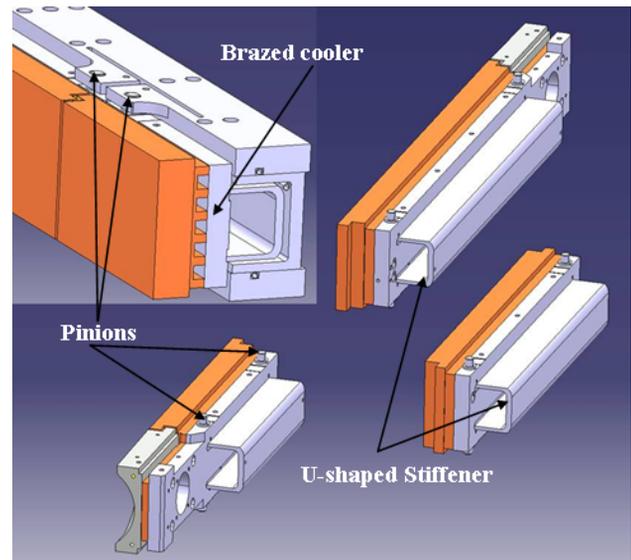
Equipped jaw sectors made up of jaw sector, cooling circuit with brazed cover and U-shaped stiffener..
